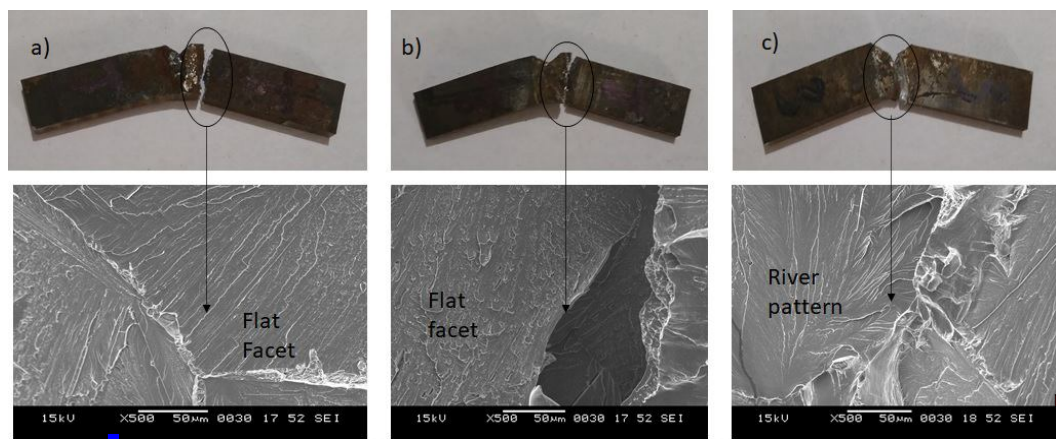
Fractography of impact specimen of a) ER 316L, b) ER 309L and c) Without Filler (Autogenous) weld
